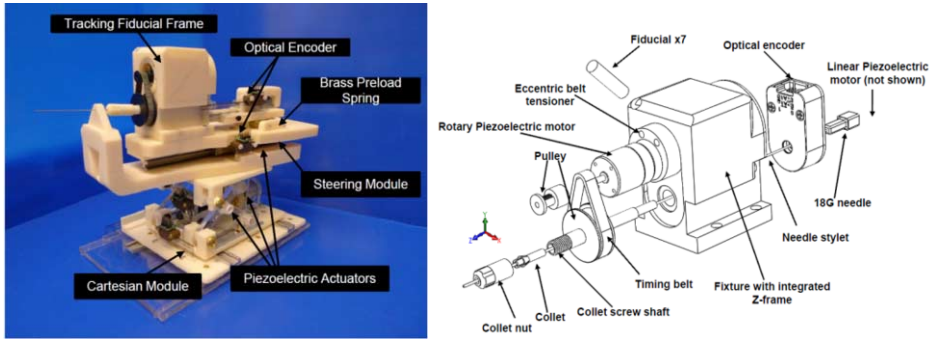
(Left) Physical prototype of 6-DOF piezoelectric needle placement robot consisting of needle driver module and Cartesian gross positioning module, (right) a exploded view of the needle clamping mechanism, optical tracking frame and rotary motor fixture with timing belt tensioner.
